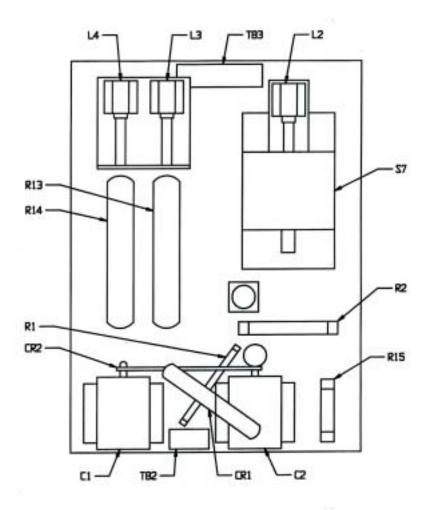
High-Voltage Power Supply and Impulse and Discharge Assembly
